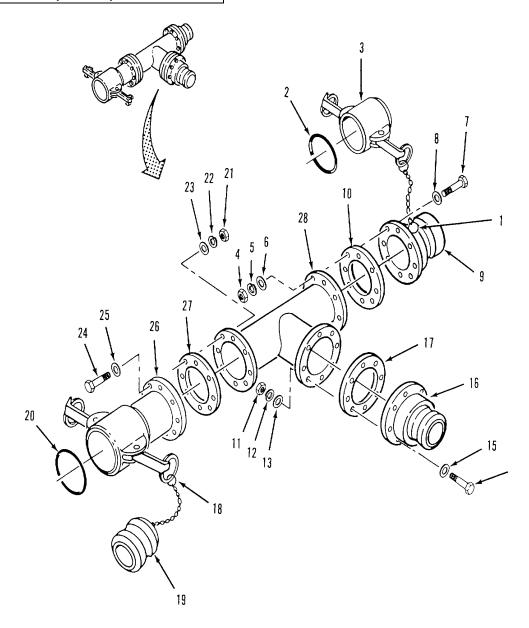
Tee Assembly (9115-Y1) Assembly.
